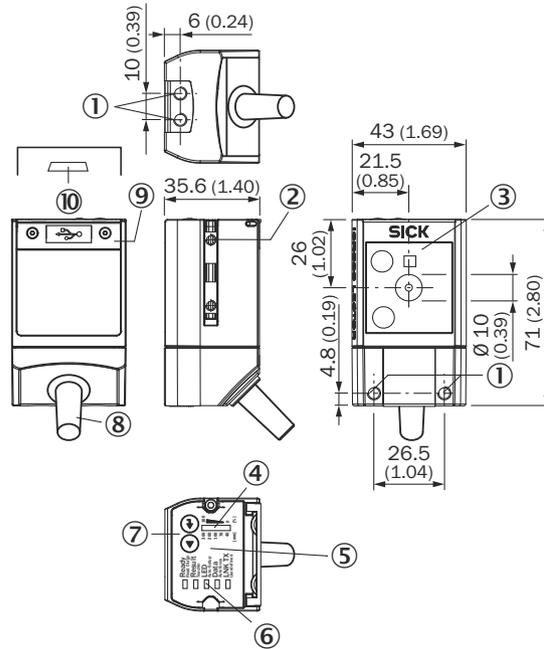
structure and device dimensions, unit: mm (inch), decimal separator: period
